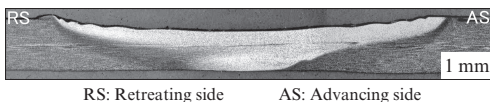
Appearance of representative weld produced by the experiment (HT780, Condition; Tool rotation speed:  $200 \text{ min}^{-1}$ -Travel speed:  $200 \text{ mm} \cdot \text{min}^{-1}$ )
